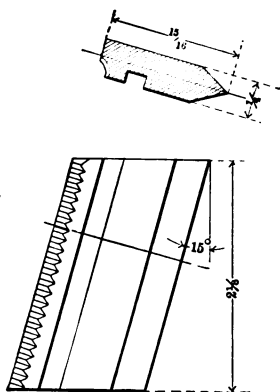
Single-Point Cutter used in Pratt and Whitney Thread-Tool Holder for Pitches finer than 4 Threads per Inch
